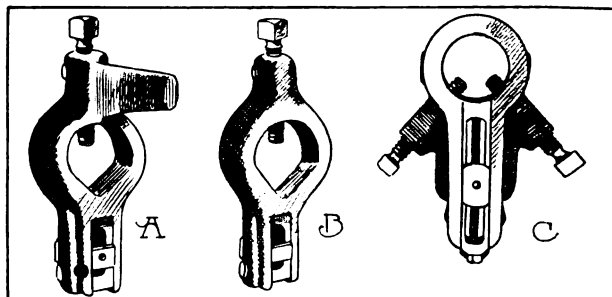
A and B, Adjustable Combination Lathe Dogs; C, Design for Heavy Work.
